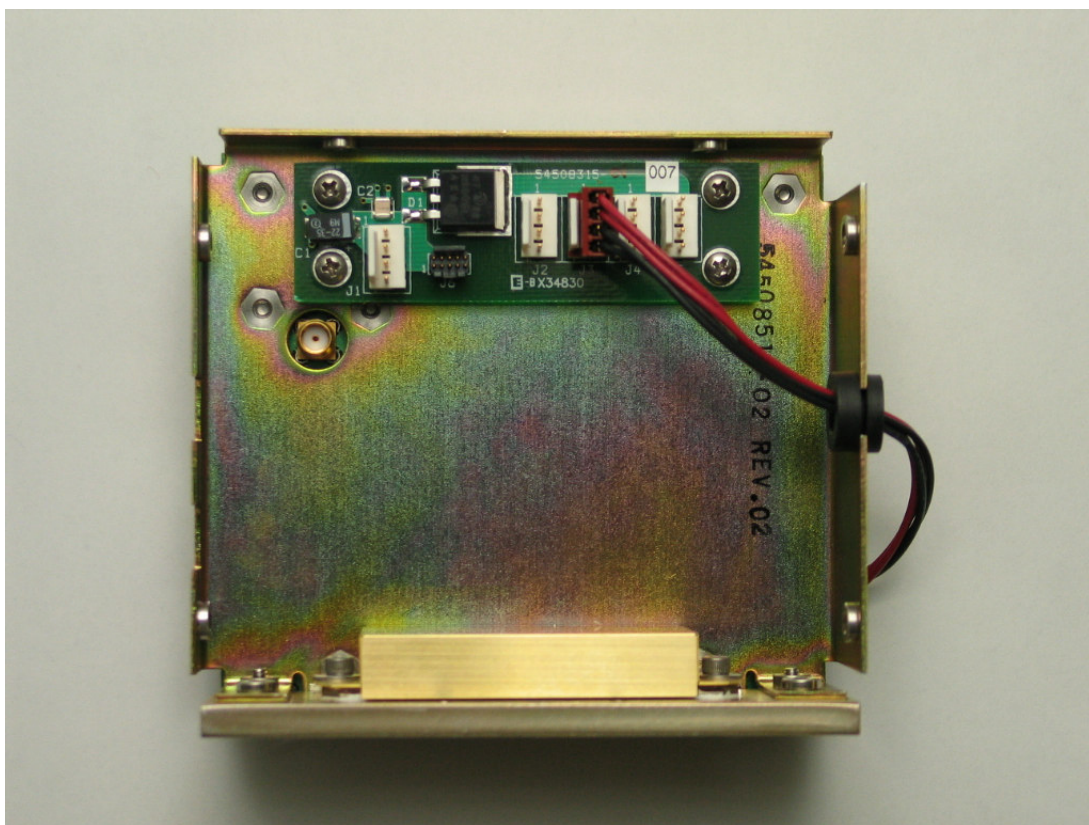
E-7 High Band Assembly, rear, (RF PA shield and DC power Distribution Board installed)
